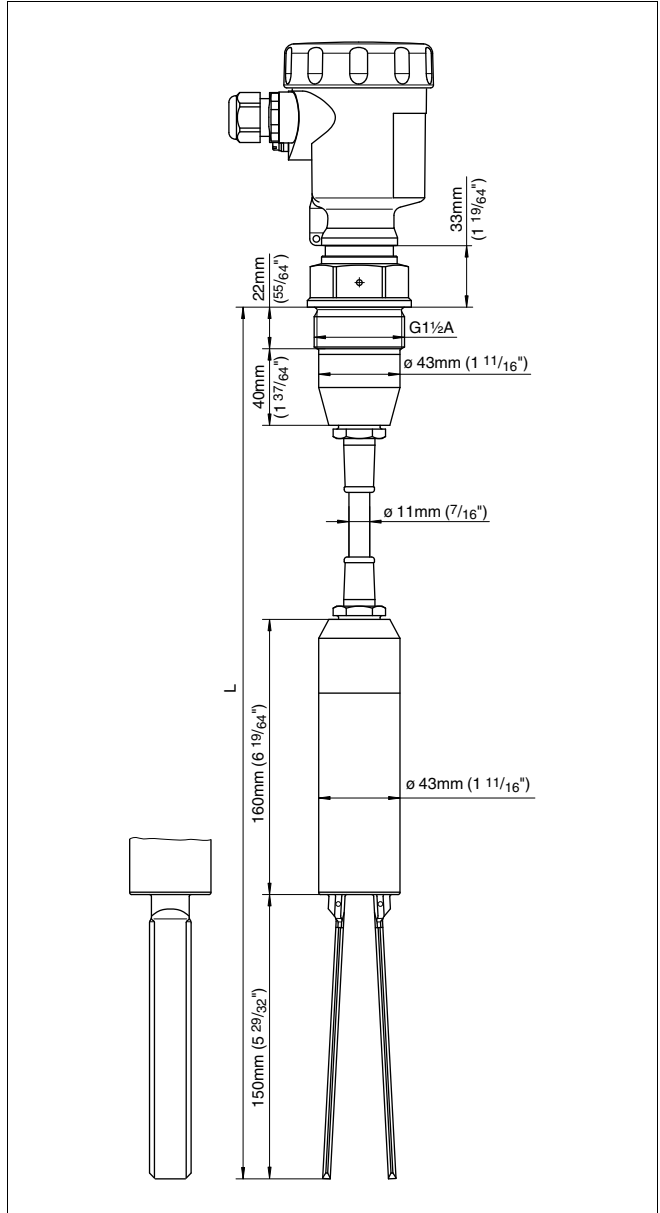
LBV 320 - with PUR suspension cable, threaded version G1½ A (DIN ISO 228/1)
